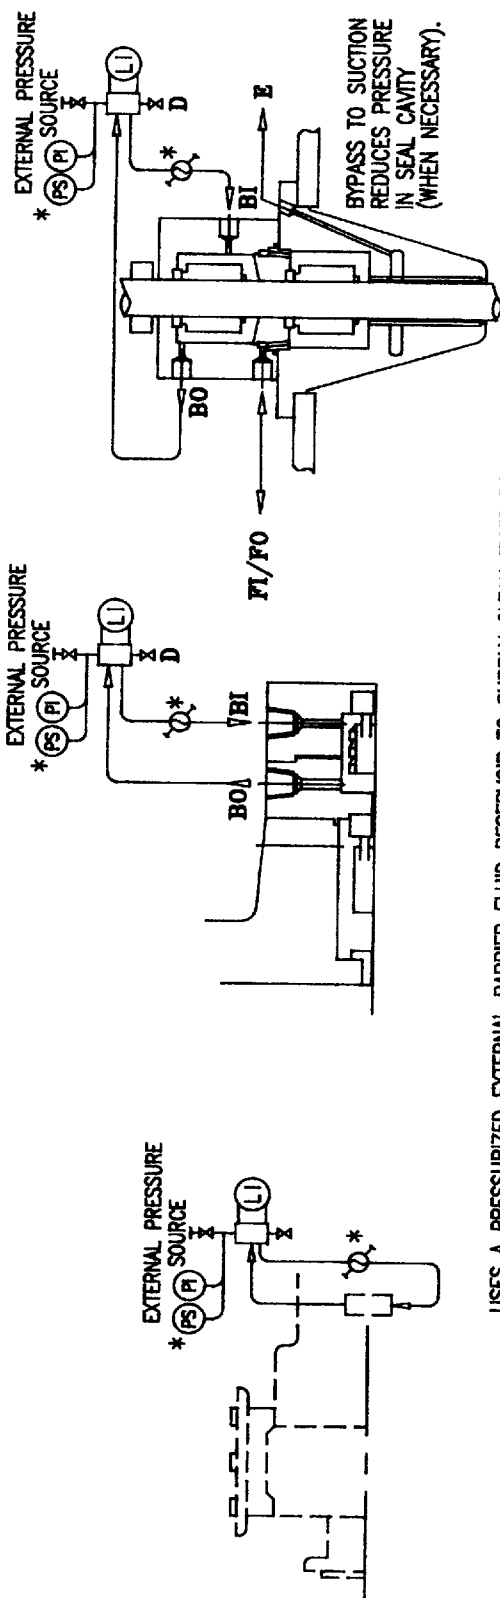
A—Piping for Throttle Bushings, Auxiliary Seal Devices, and Dual Seals—Plan 52
